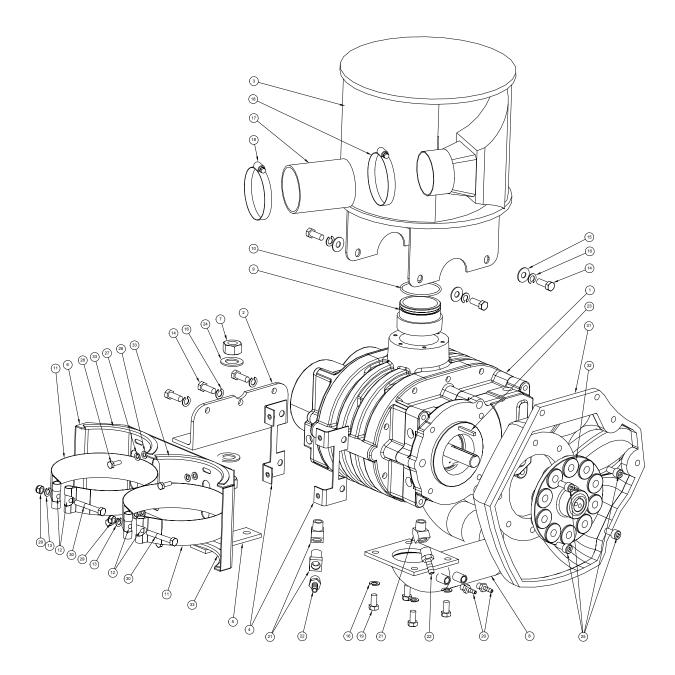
Air Cleaner Assembly CTS 450 Diesel C-5879 Rev -
